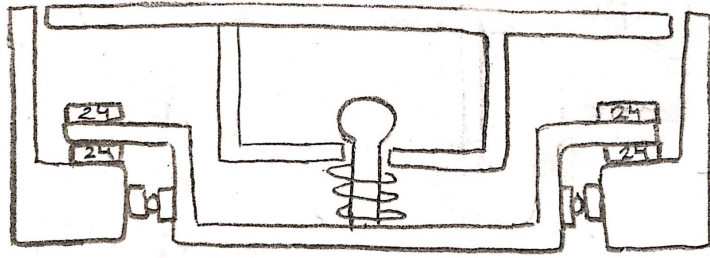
Design which combines ball and socket joint, compression spring, Align PM and bearing.
